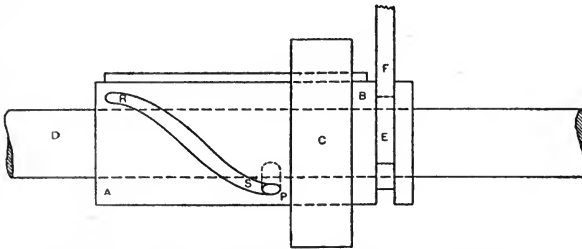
Crank Valve Gear, Reversing Arrangement.
